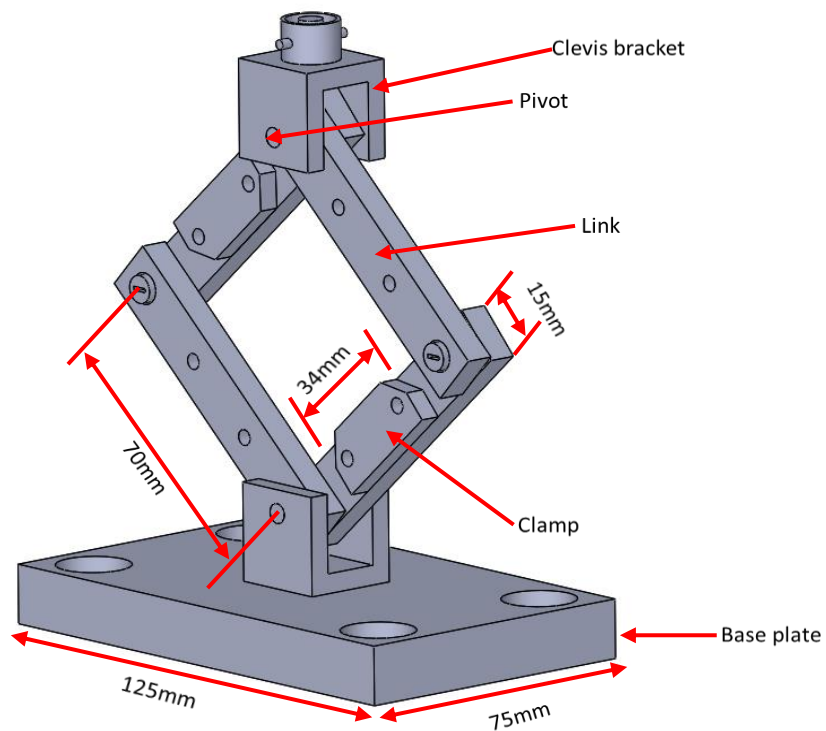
Construction and dimensions of in-plane shear testing apparatus [47]
